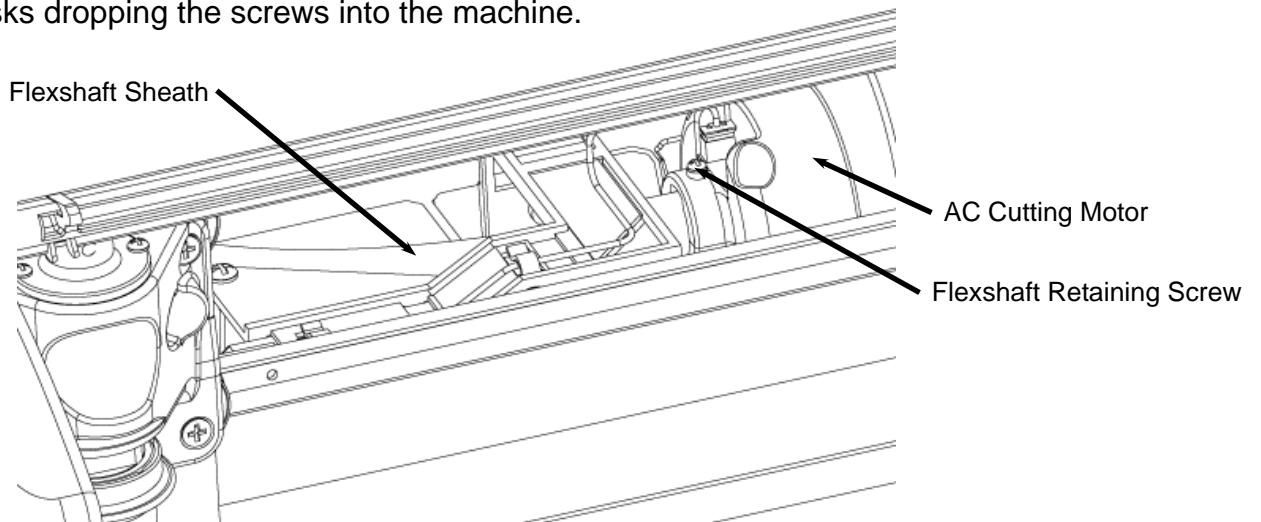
VIEW OF THE AC CUT MOTOR AND FLEXSHAFT WITH THE COVER LIFTED
